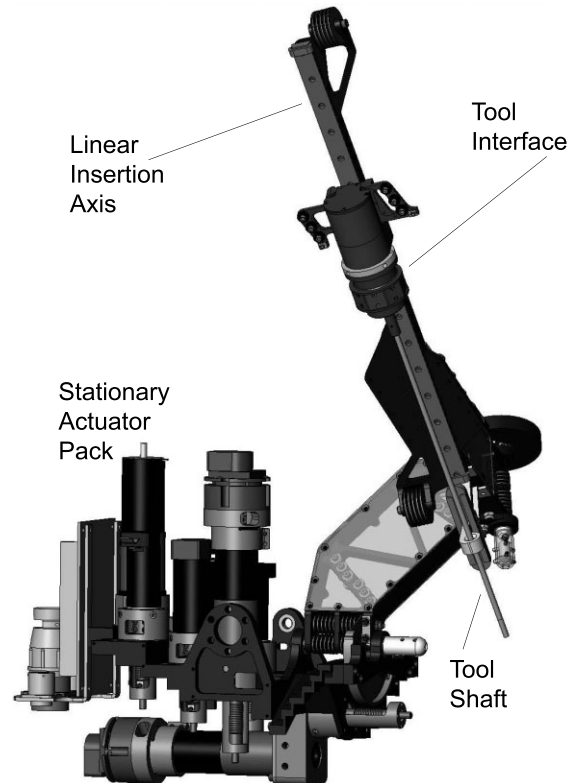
CAD rendering of surgical manipulator shown with plastic covers removed. Mass: 12.3 kg; folded dimensions 61 cm \times 53 cm \times 38 cm; extended dimensions: 120 cm \times 30 cm \times 38 cm.
